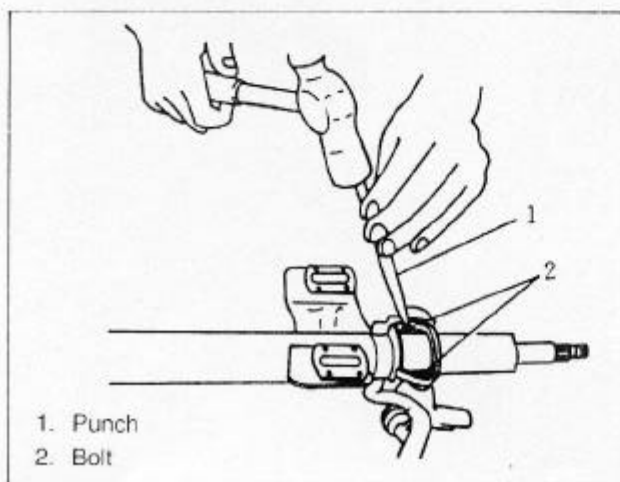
C — 13 DISASSEMBLING STEERING LOCK
